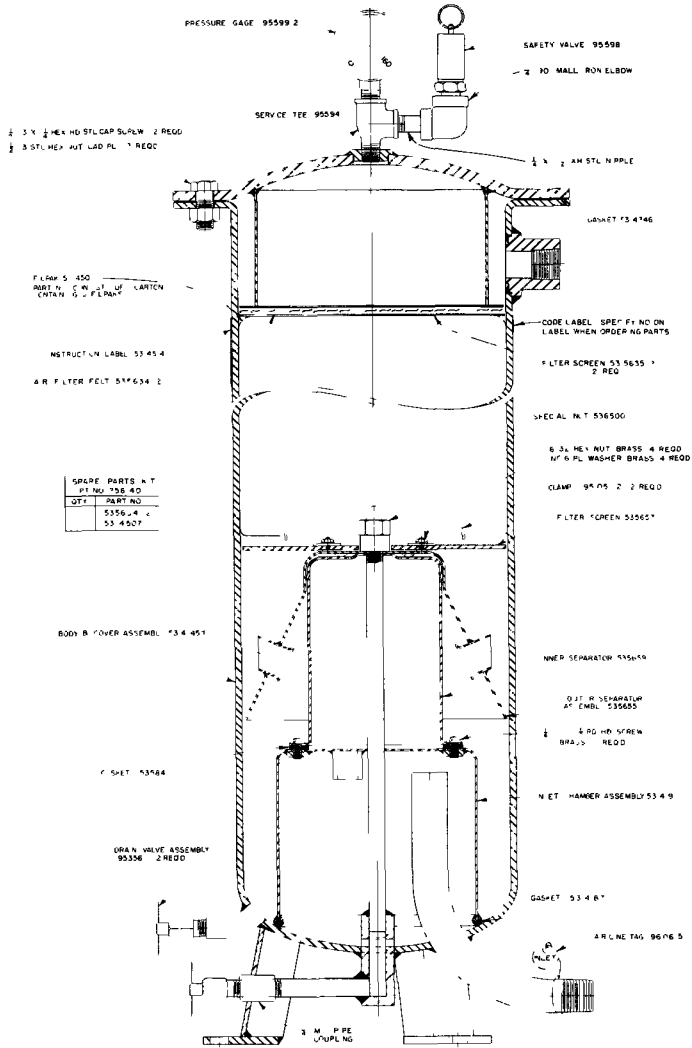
Parts Draw ng P95 15, A r F ter 30cfm Copac ty, Part Number 5314200-1
